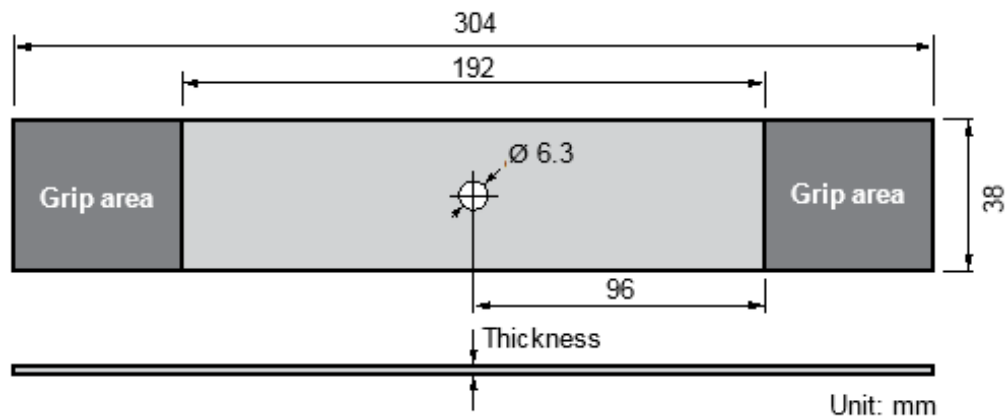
Dimensions of the open hole tension (OHT) specimen [71].
